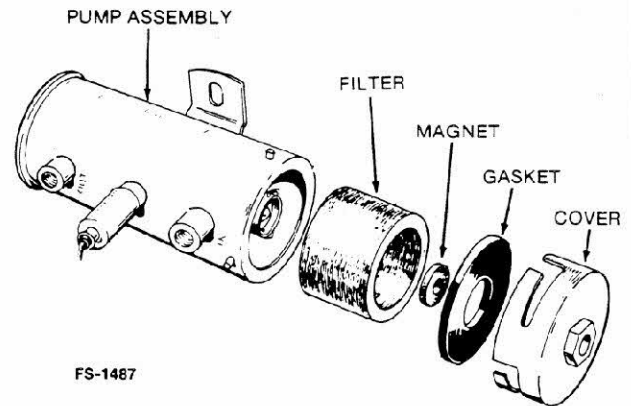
REMOVAL OF MAGNET AND FILTER
